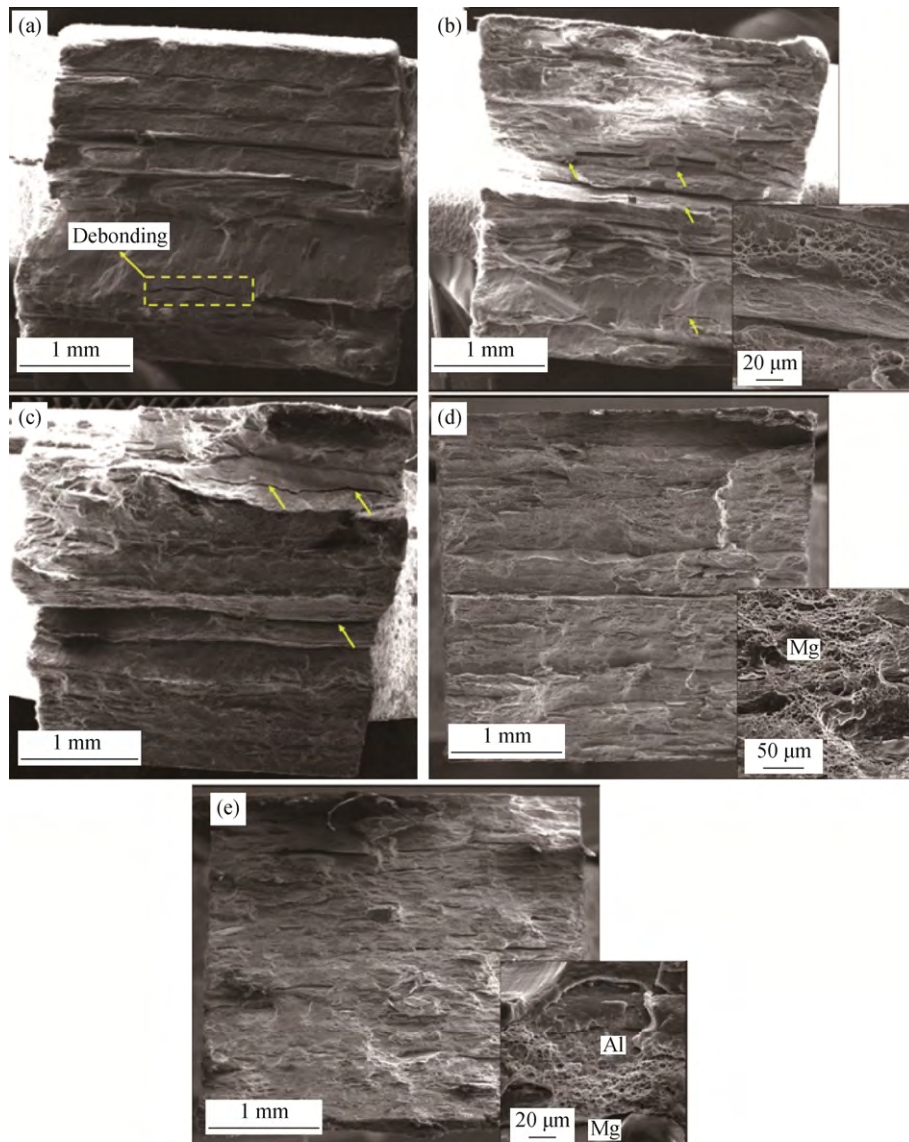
Tensile fracture surfaces of the Al/Cu/Mg multi-layered composite: (a) primary sandwich; (b) after the first cycle; (c) after the second cycle; (d) after the third cycle; (e) after the fourth cycle.
